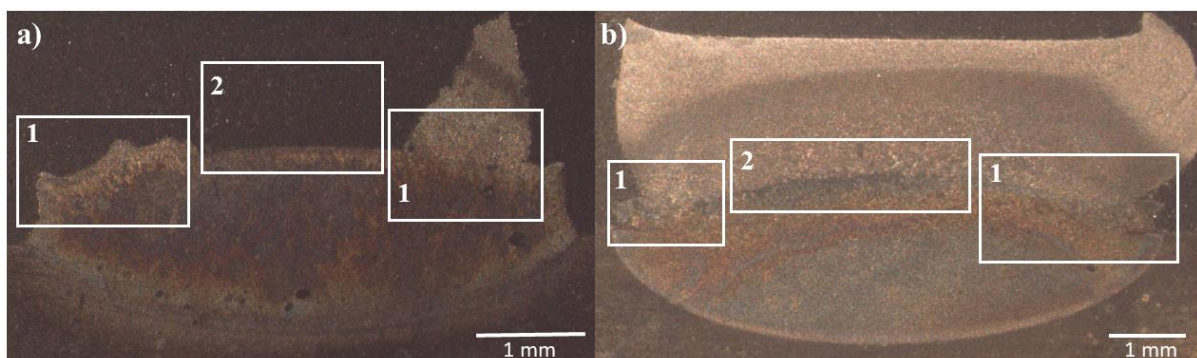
Two weld nugget macrographs: a) a nugget that failed, b) a nugget that did not fail;
